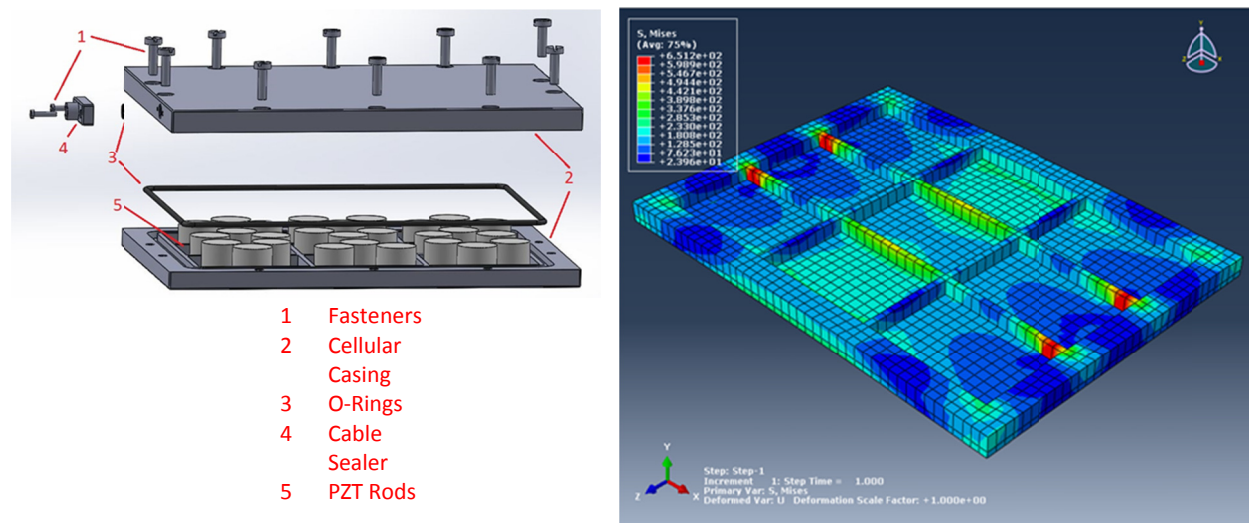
Prototype II; CAD Drawing and Part of the FE Analysis Mesh.
